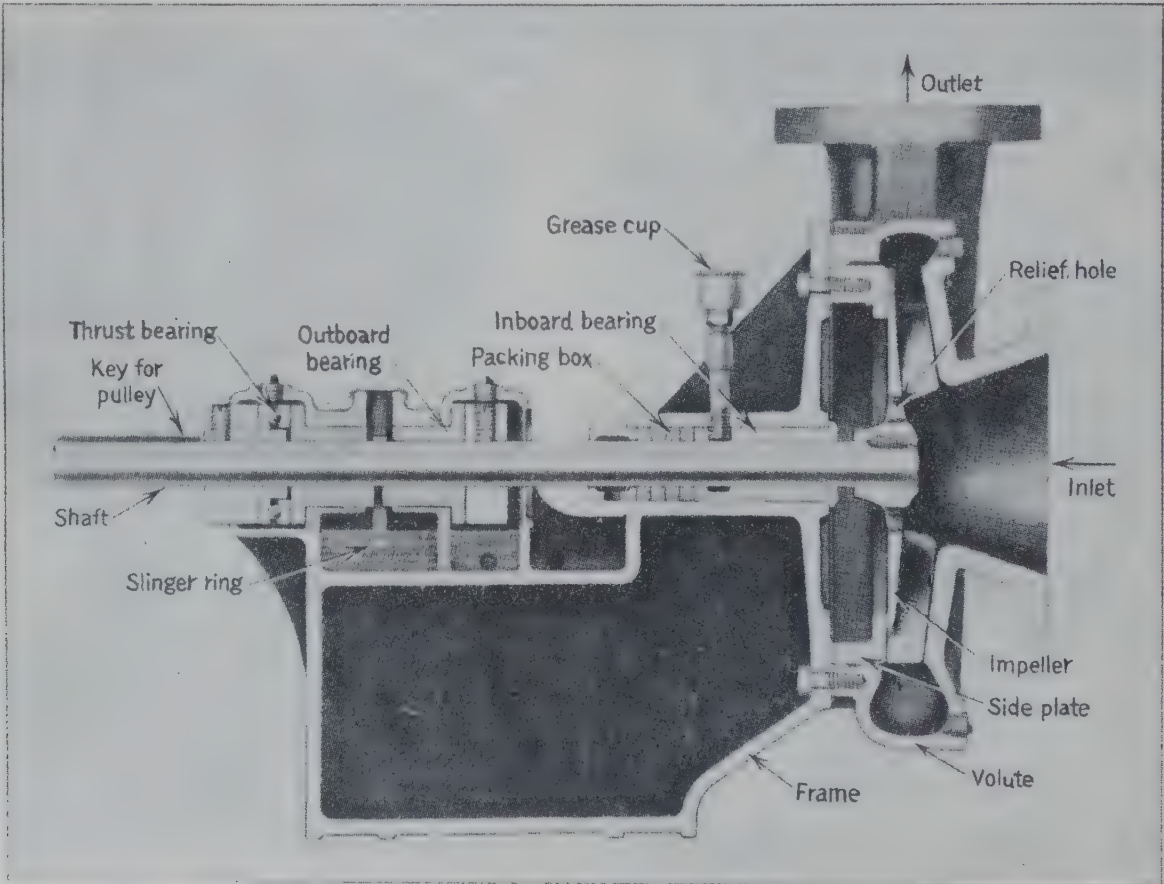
Sectional view of a side-suction centrifugal pump. (Fairbanks, Morse and Co.)
